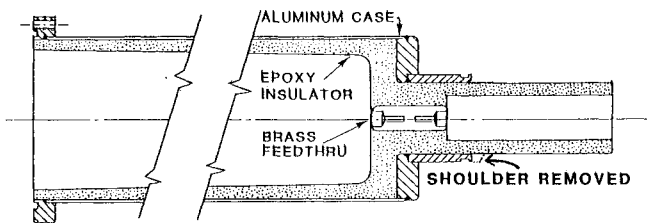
Section through the housing showing the place where the shoulder was removed.
